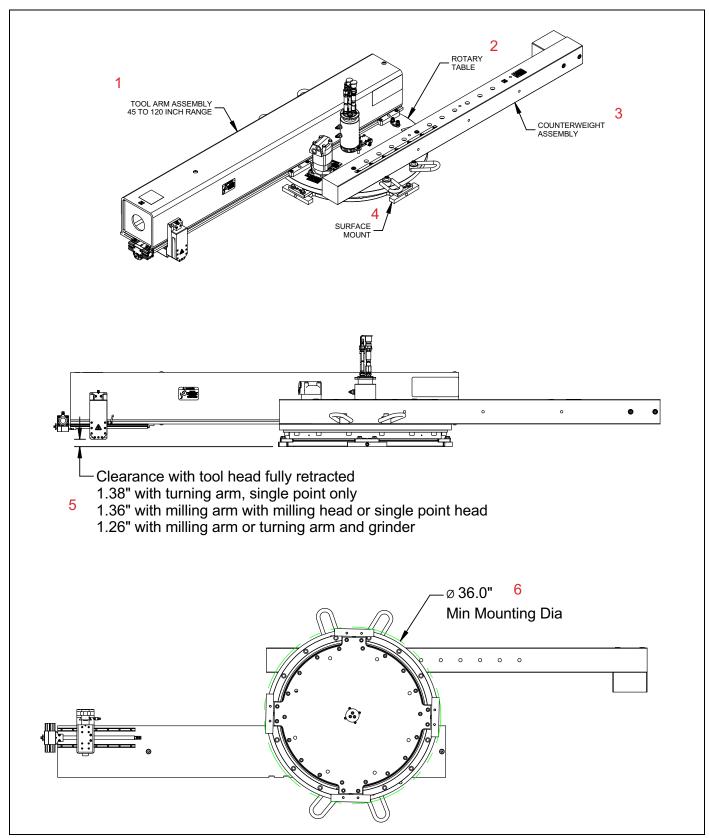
SURFACE MOUNT SINGLE-POINT DIMENSIONS
